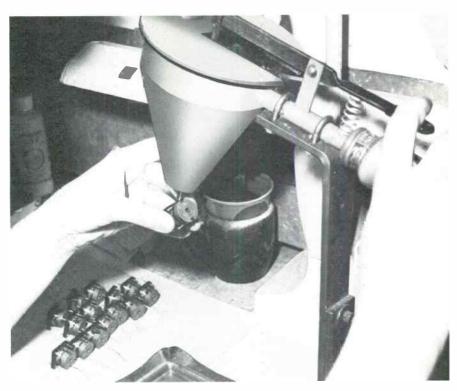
Hot wax is applied, using the hot-melt technique, to fix a toroidal coil to its housing.
